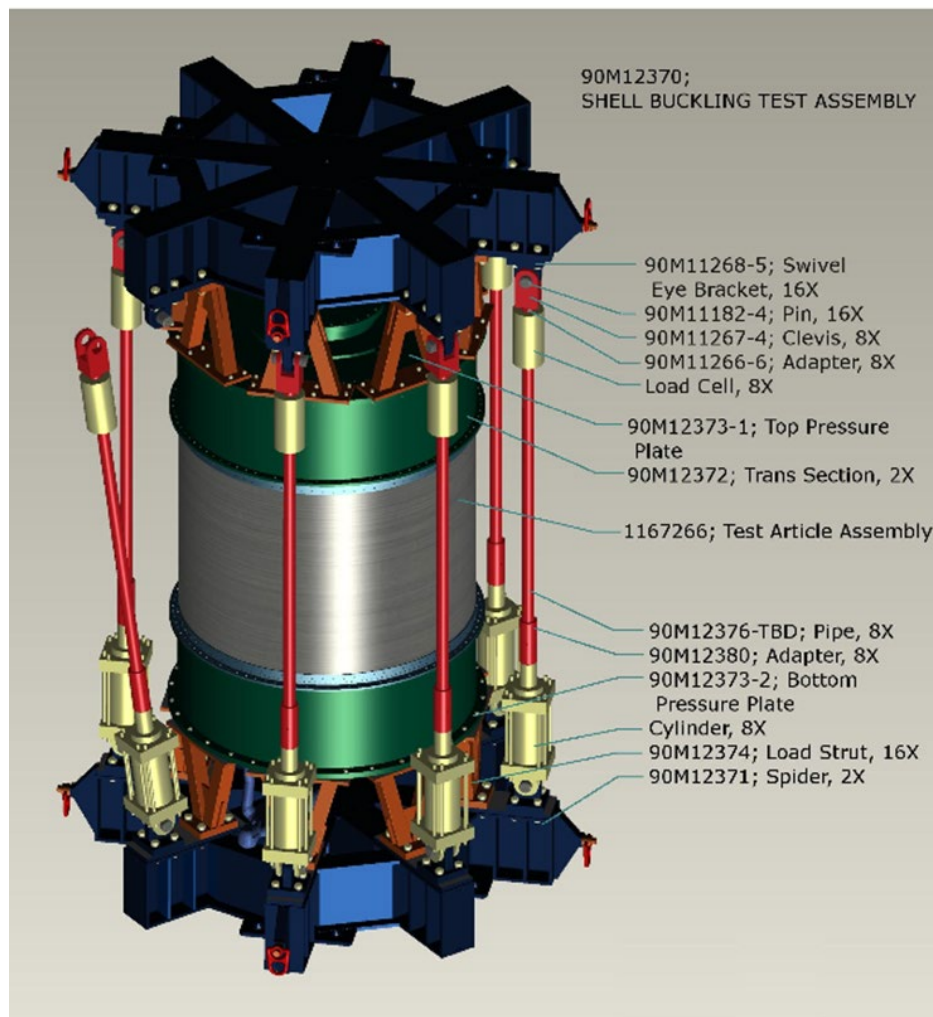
SBKF test assembly at MSFC, MSFC drawing #90M12370.
